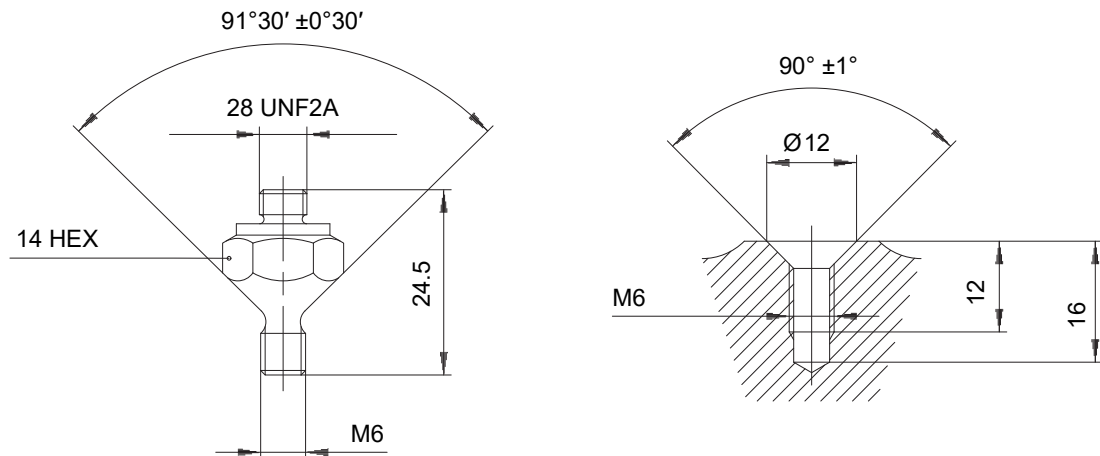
Mounting CE6xx and PV6xx piezoelectric sensors on a machined surface using a mounting stud or adaptor
